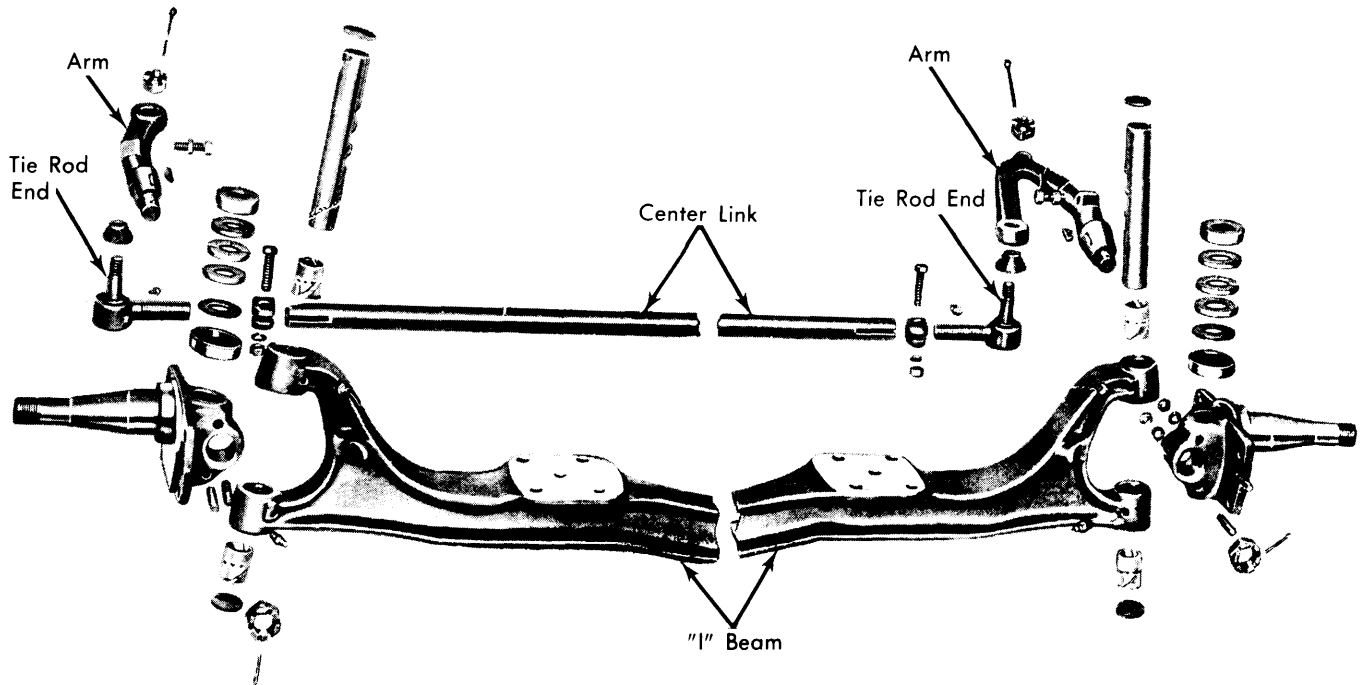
Disassembled View of Motor Home Chassis Steering Linkage (Typical, Linkage for Elliot Type Axle Shown)
